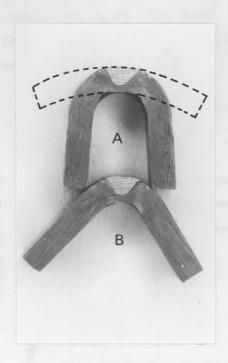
Hot rolled-and-tempered (A) and hot rolled (B) 3CR12 bead-on-plate bent specimens welded with 316L.
